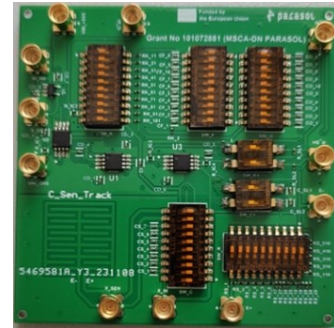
Fabricated PCB of Capacitive touch sensing circuit.
